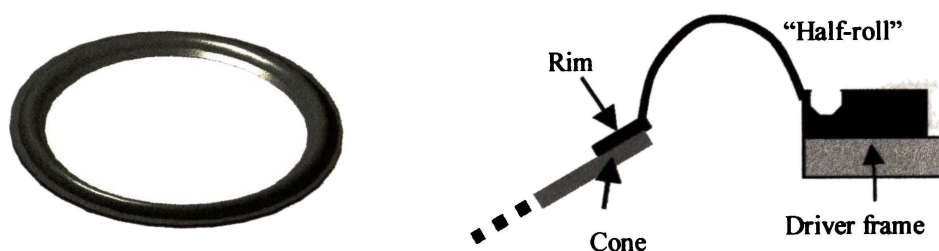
a) Surround b) Section view of surround, driver frame, and cone edge
